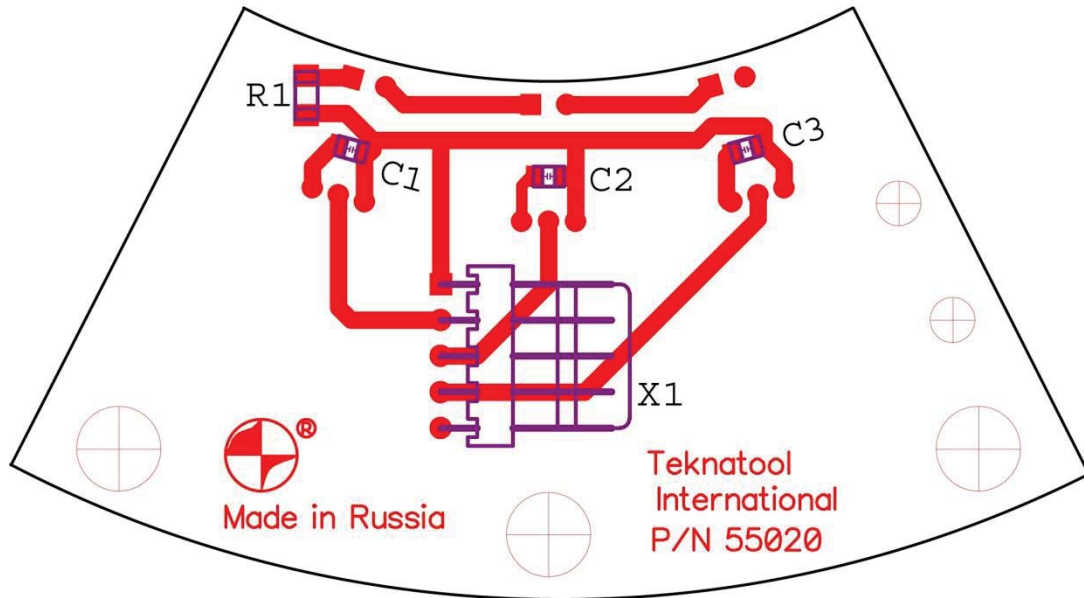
Rotor Position Sensor Circuit Board Top Layer
